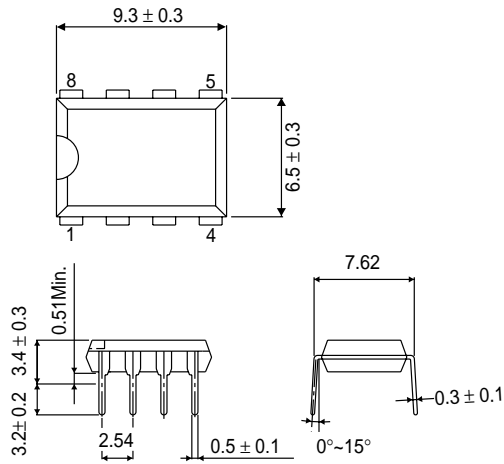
Dimensions DIP8 (BR93L66-W)
